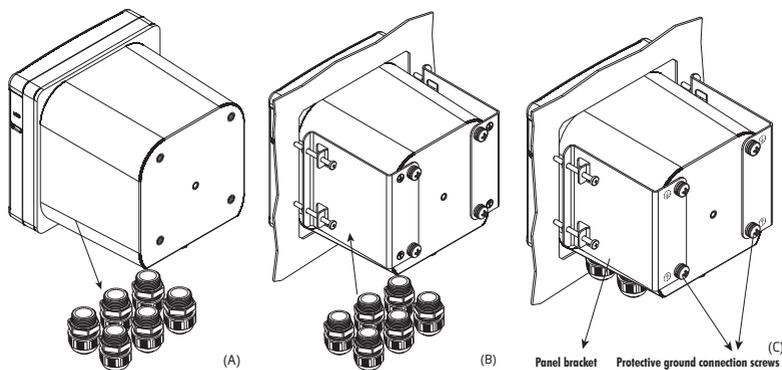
Panel-Mount Steps, Parts (A) (B) (C)
